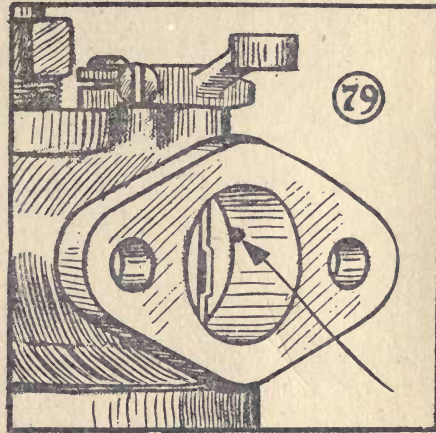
The low-speed hole should show between .02 and .04 when the throttle is shut on the Holley
